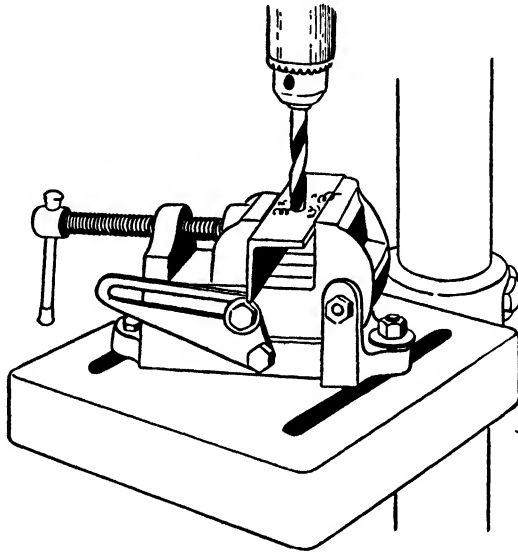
A drill vise is especially good for holding small parts while being drilled.
